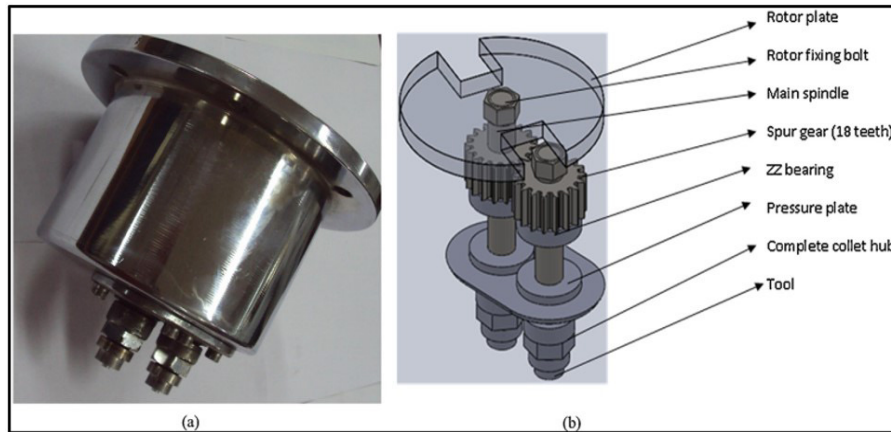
Counter-rotating twin tool set-up (a) schematic diagram (b) [125].
